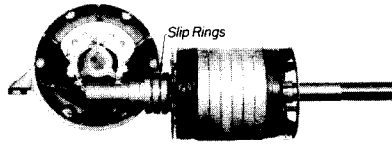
A wound rotor and an end plate of a three-phase motor. (*Wagner Electric Company.*)
